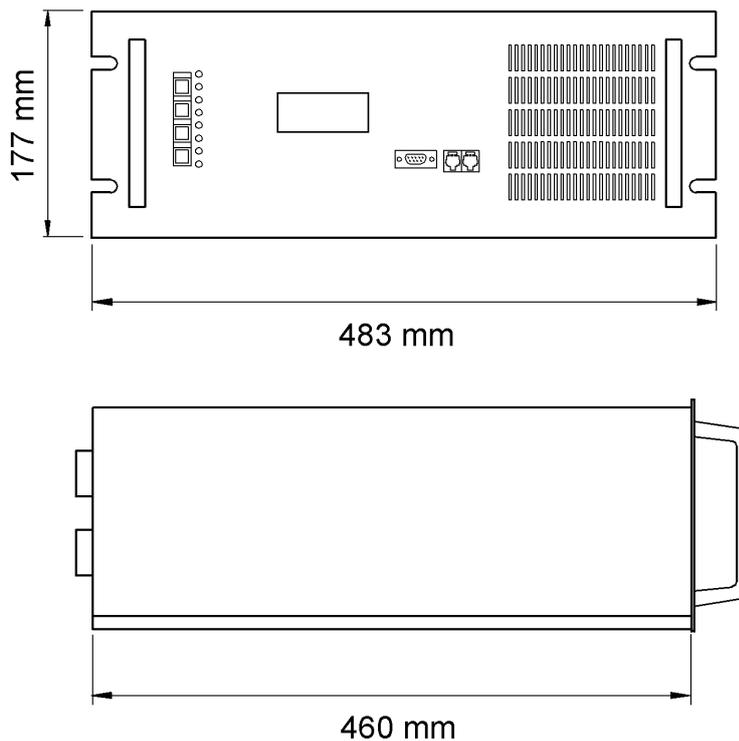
Dimensions UNB23.0 to 40.0kVA
